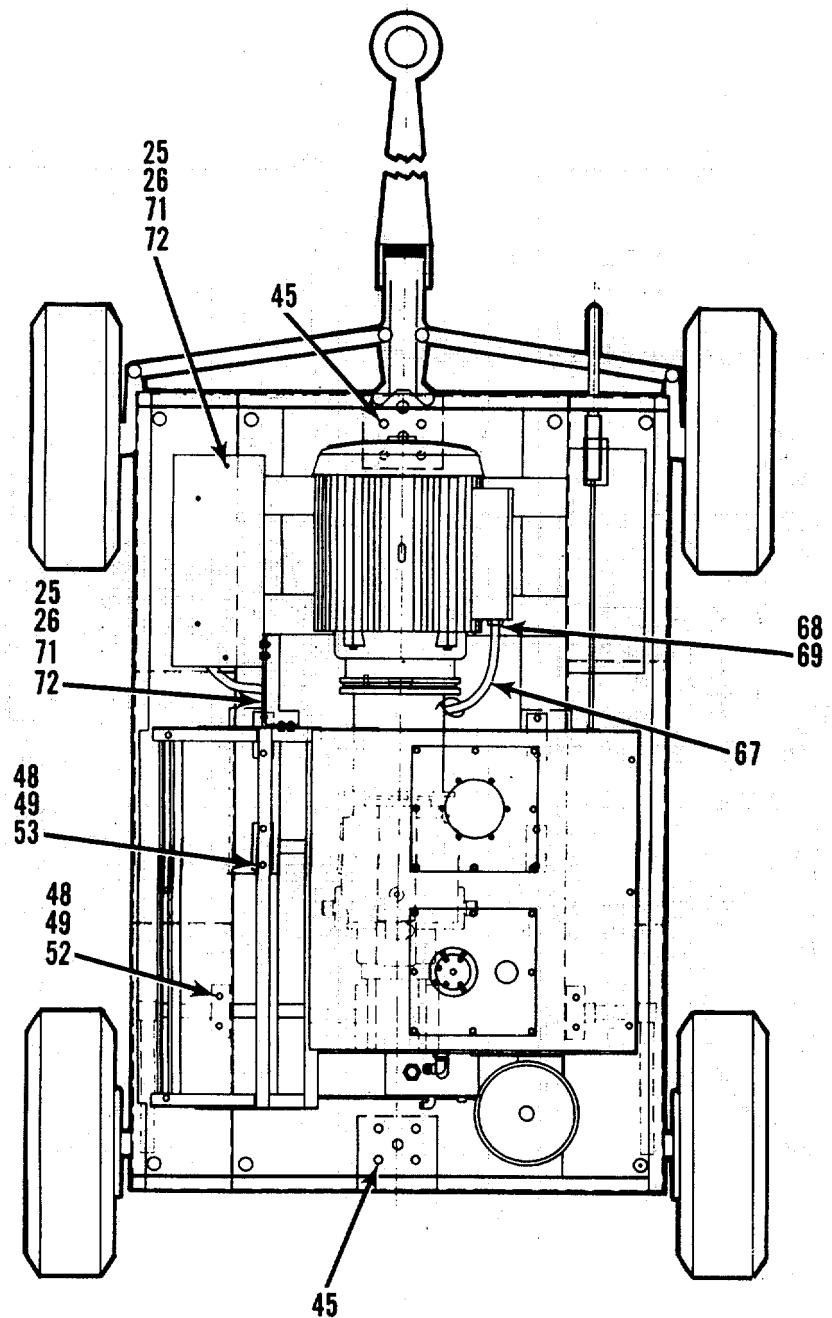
Internal Components Assembly, D-6A (Sheet 2 of 3)
